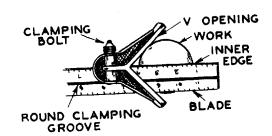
SCRIBING A CENTER LINE USING A CENTER HEAD
